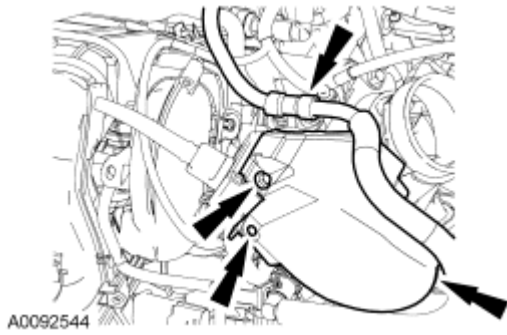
Locating Accelerator Snow Shield, Screw And Pin-Type Retainers
